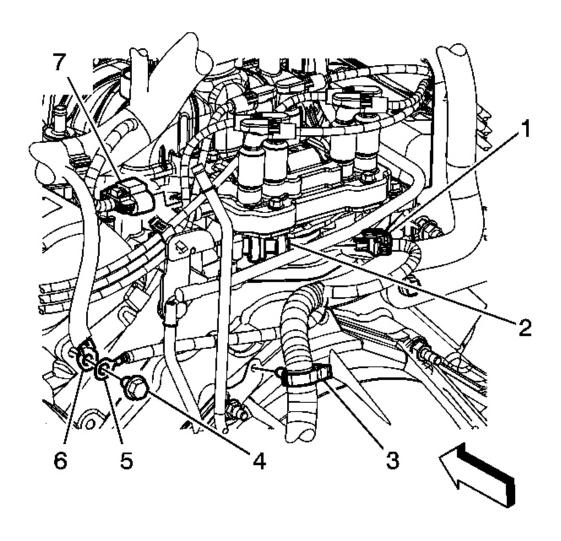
View Of Engine Wiring Harness Electrical Connector Courtesy of GENERAL MOTORS CORP.
